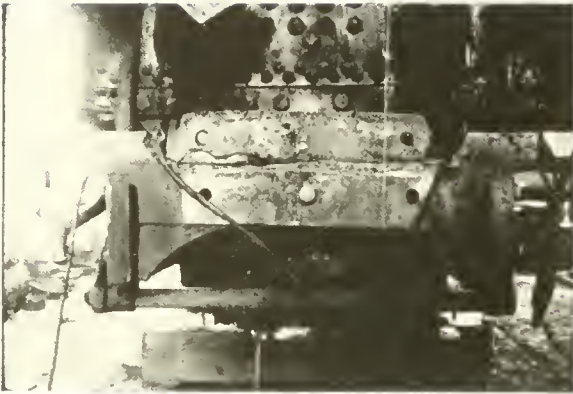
BEFORE. The edges of the sections are chipped out with the hammer, making a "V" shaped groove.
